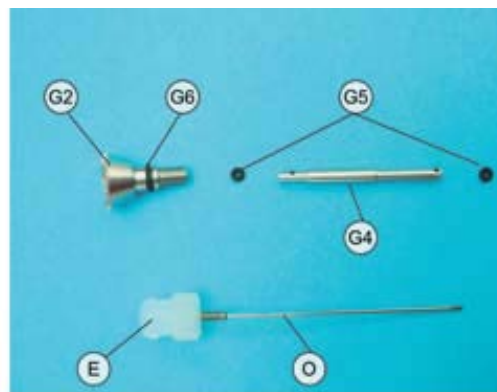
Liquid feed shaft inner components necessary for the capillary cooling circuit: liquid feed capillary (O) with Luer Lock connector (E) and M2 thread adjacent to it, capillary locking nut (G2) with corresponding o-ring (G6), liquid feed shaft spacer (G4) and capillary o-rings (G5)
